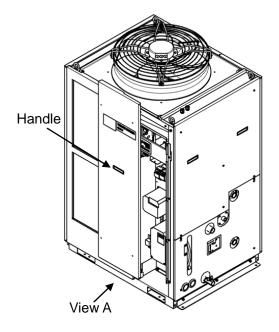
Remove the front panel for the electrical unit (This drawing shows air cooled type.)
